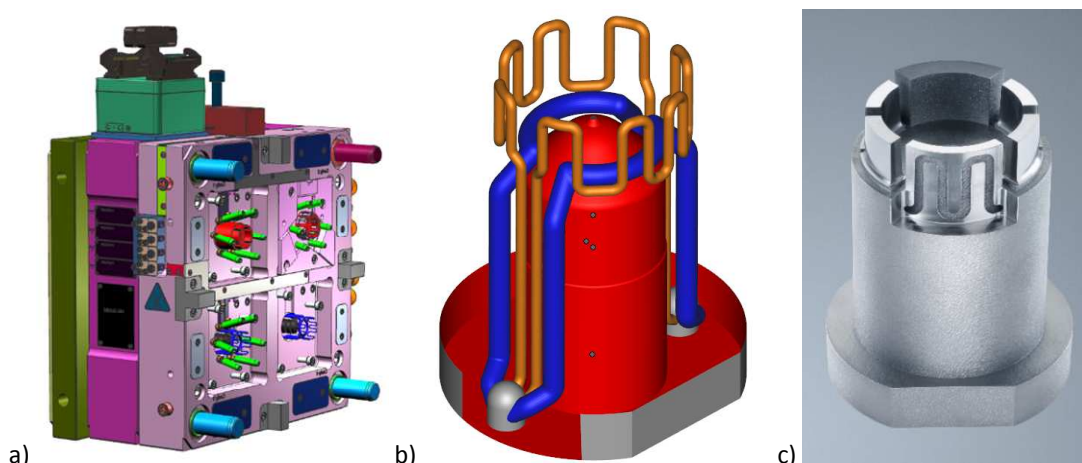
The part shown on the pictures is a so called “gate bushing”, a very common part used in plastic injection molding: a) Shows one half of the mold with 4 cavities – each cavity is equipped with one gate bushing; b) CAD-Model of cooling lines; c) 3D-printed part, partially finished, partially opened for demonstration of the channels inside.
